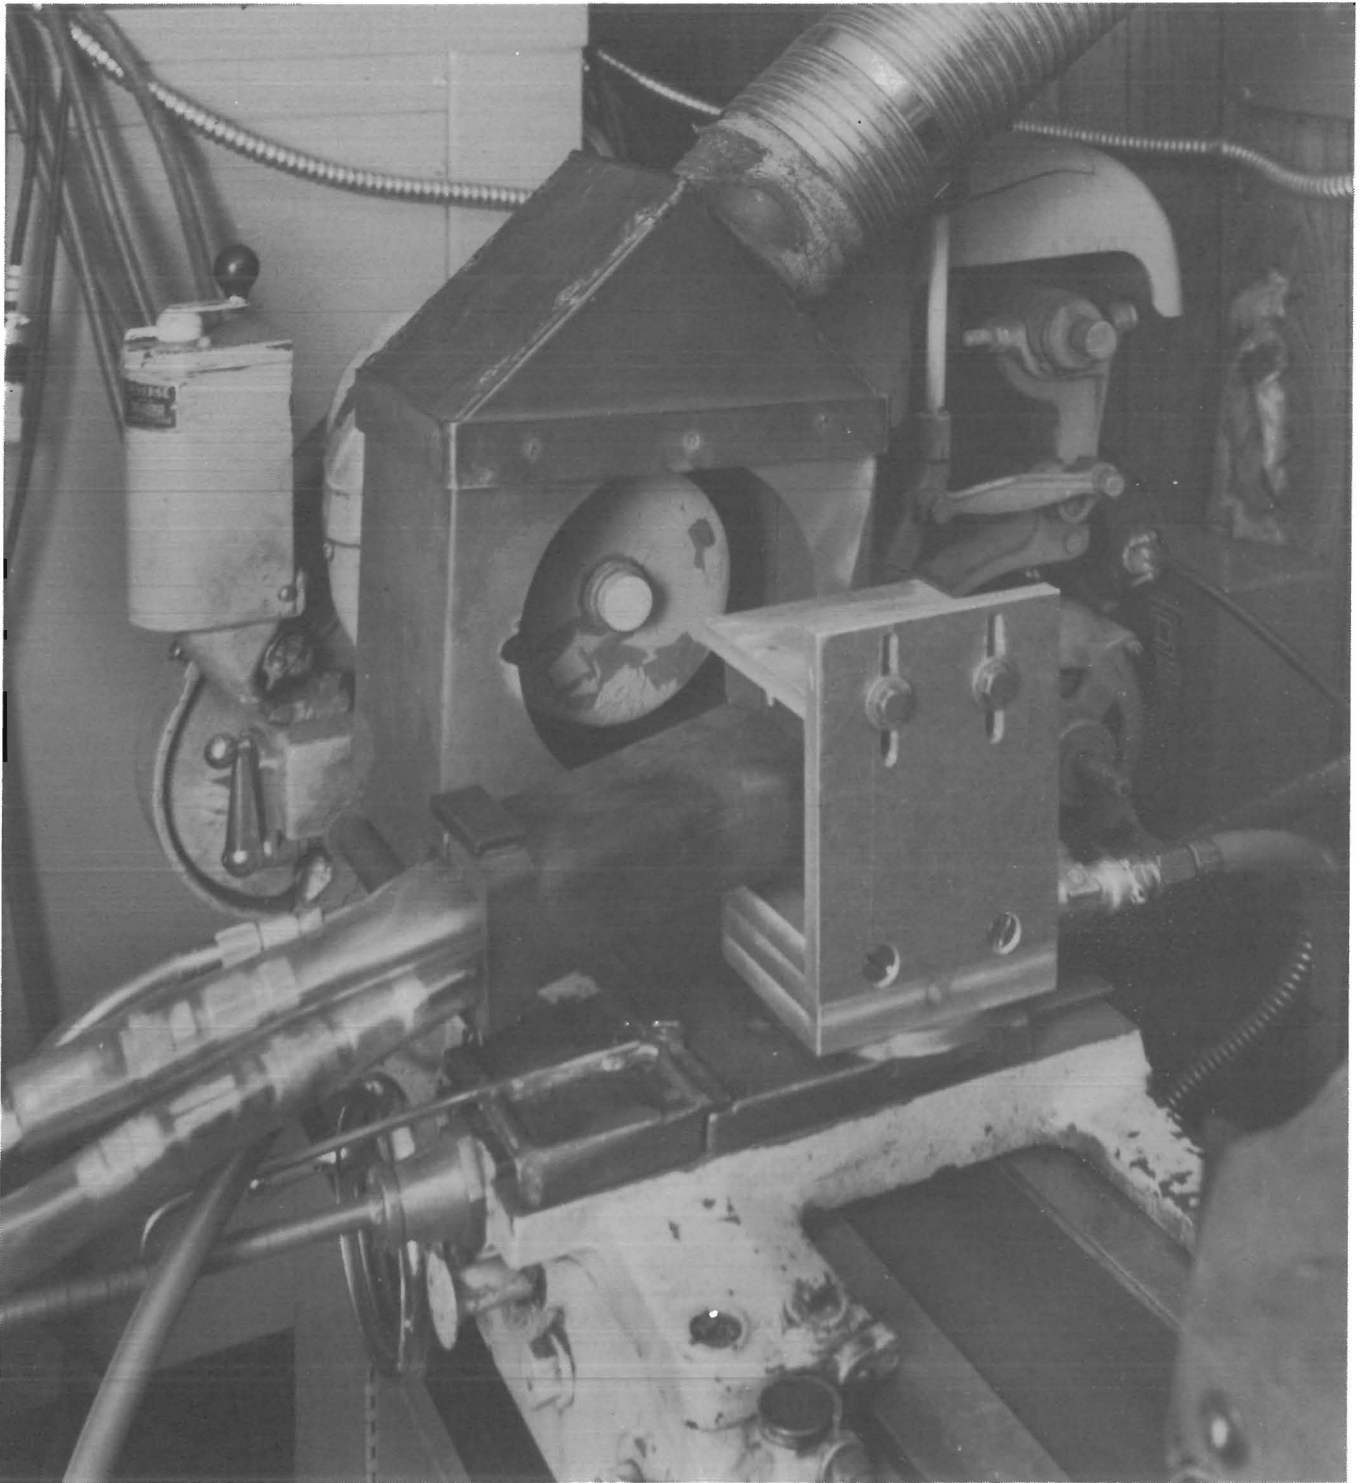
Water-cooled plasma torch and specimen holder. Torch is fixtured to provide horizontal motion at constant distance to specimen. A coated 25-mm-diam specimen is mounted in a lathe chuck inside a ventilation hood.
